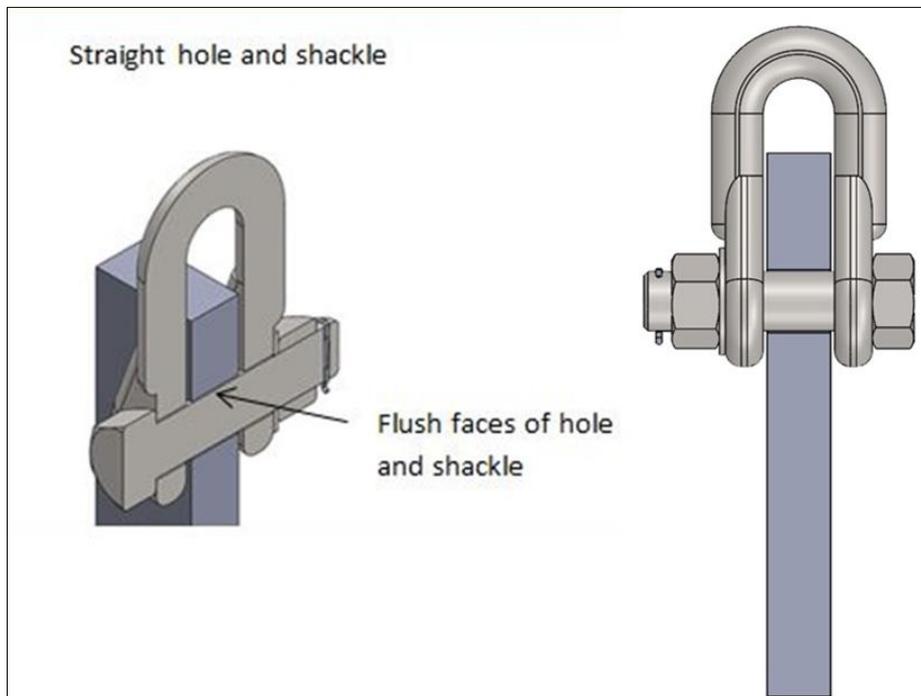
Guy Foundation Link Plates - Straight Hole and U-Bolt
